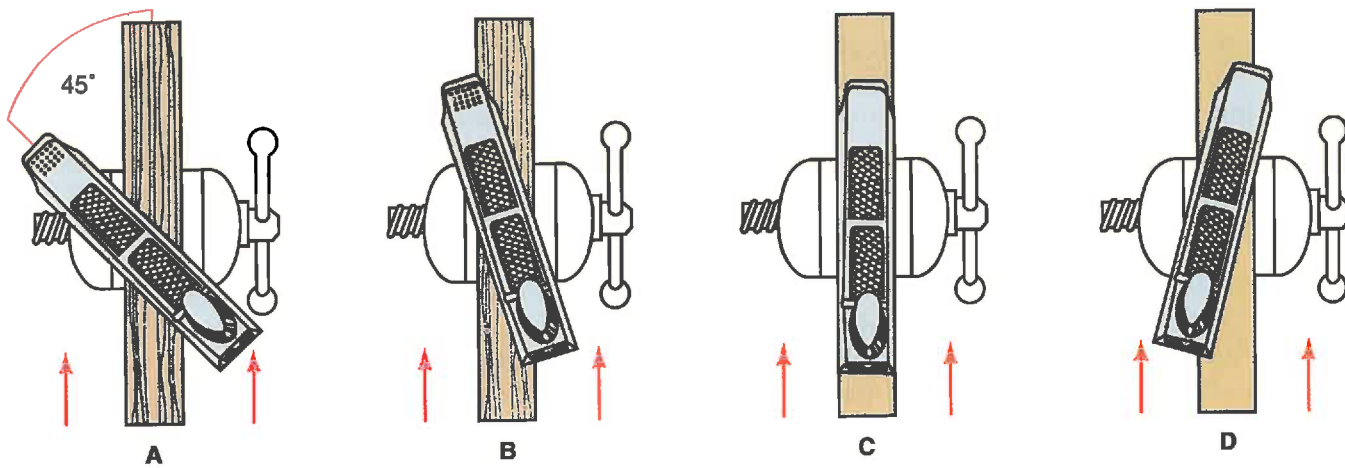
The hardened steel teeth of a Surform® tool remove material without clogging. (Stanley Tools)
